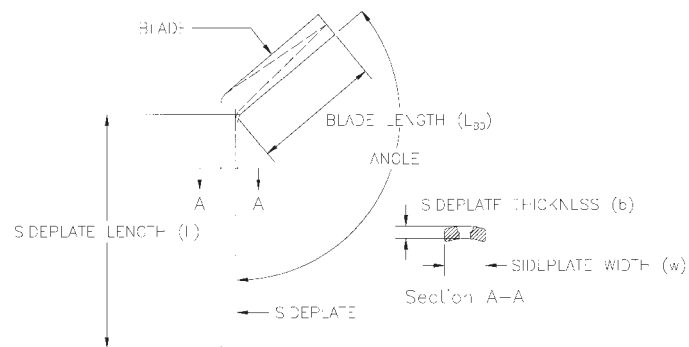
Diagram Illustrating Blade Plate Angled Devices
